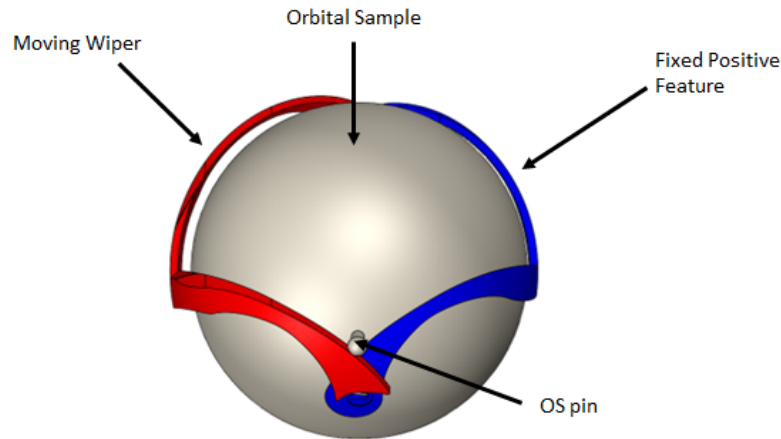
Wiper mechanism system. The Wiper sweeps a spherical profile around the OS engaging the pin in a converging fashion such that the pin terminates in a predetermined location [124].
